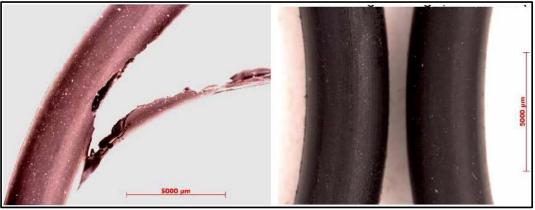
Damaged O-ring (left) and a comparison of new and used O-ring surfaces (right).
